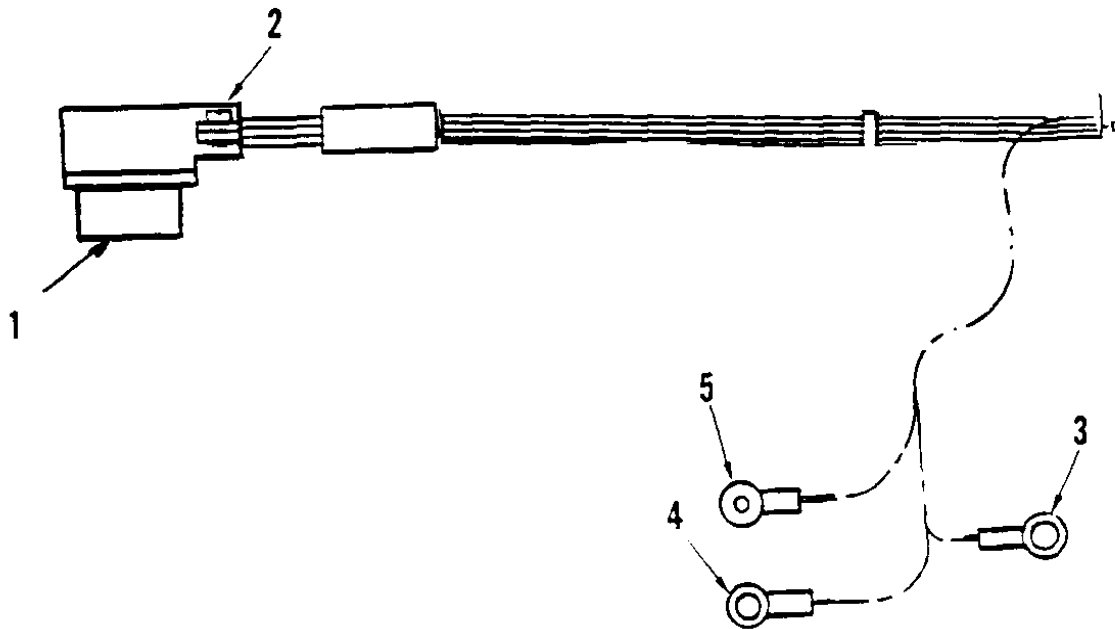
Figure M. Transformer Rectifier Unit (TRU) Harness Assembly, 83-360D
